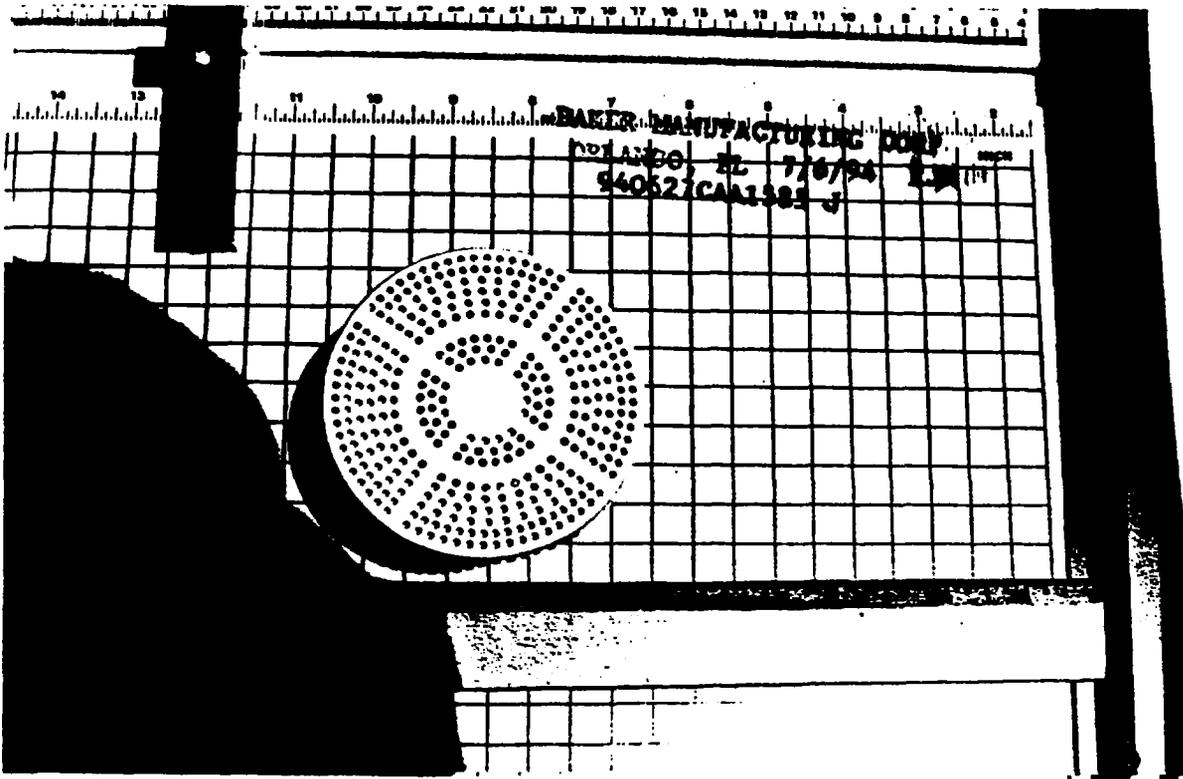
DOMED COVER SHOWN IN THE INSTALLED POSITION OVER THE "THRU FLOOR FITTING"
